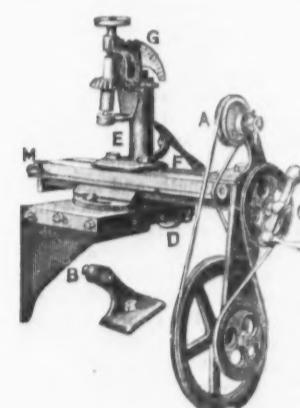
Universal Cutter and Cylinder Grinder with Vertical Head
